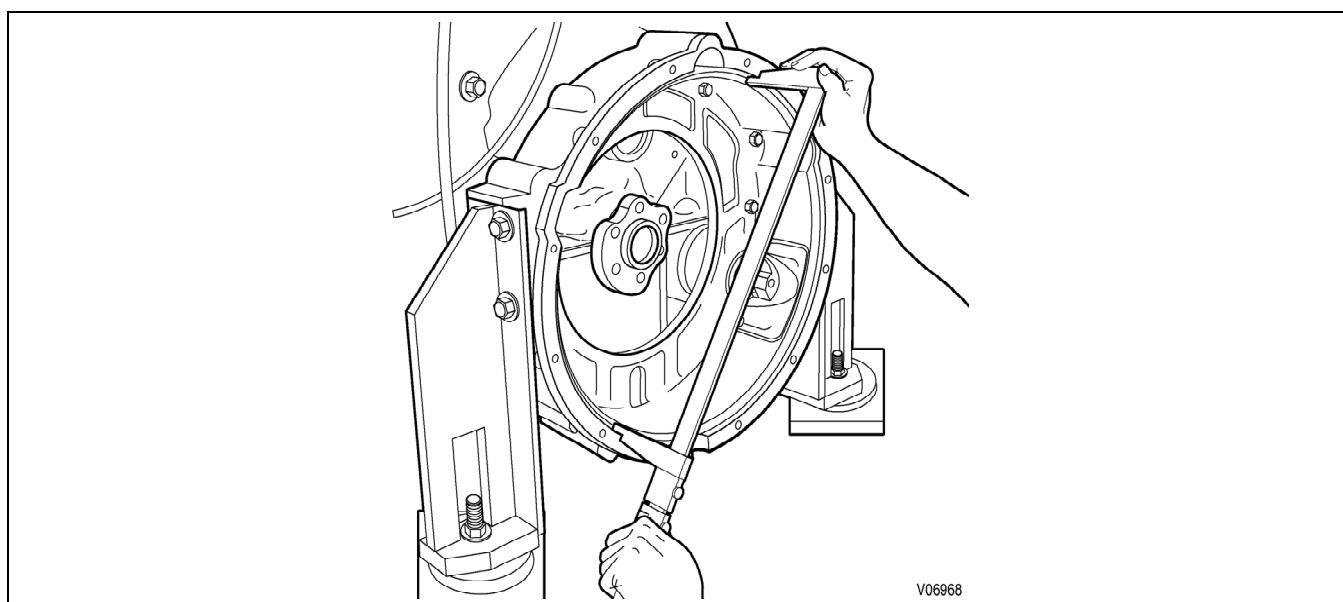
Measuring Flywheel Housing Bore Diameter — Inside Caliper Method
